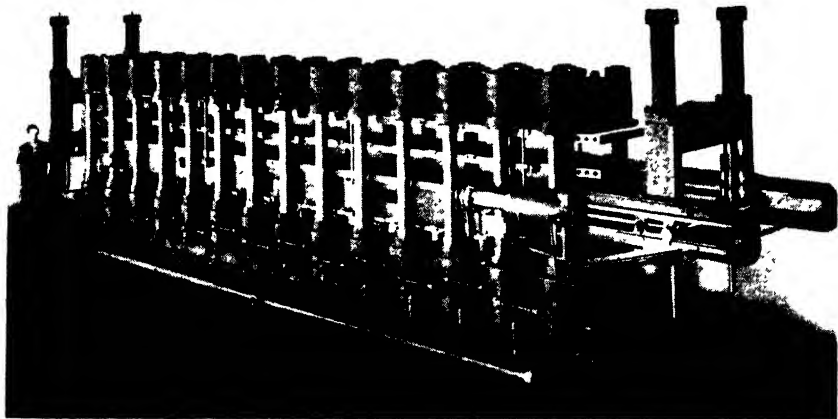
Hydraulic Press Used in Vulcanizing Rubber in Belts.
